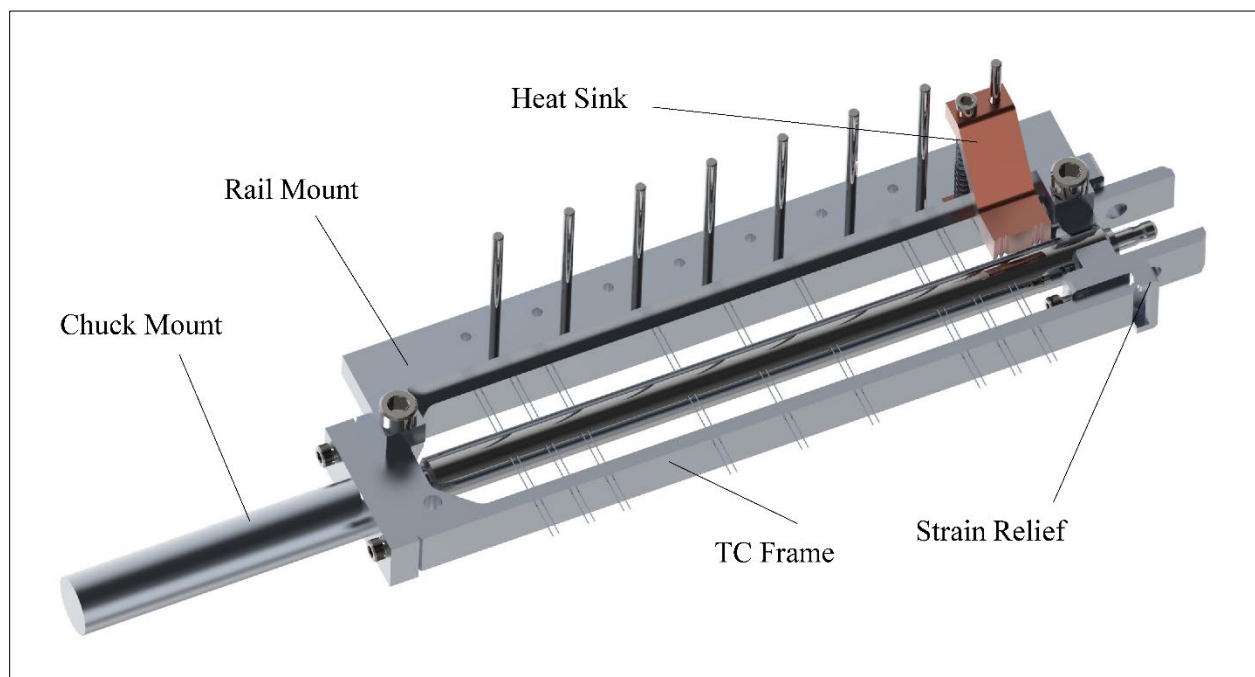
A representation of the prototype fixture used to weld TCs to the surface of rodlet cladding.
